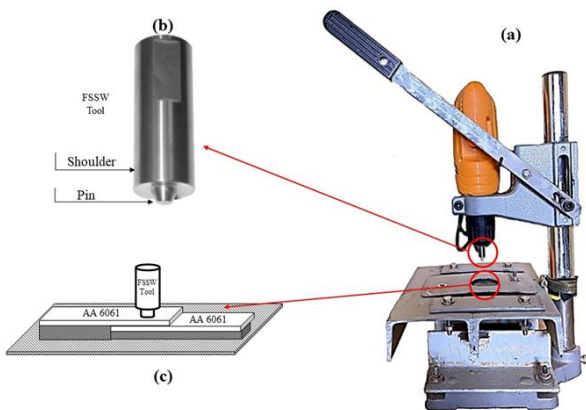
The FSSW apparatus (a) main apparatus, (b) FSSW tool, (c) specimens' arrangement
